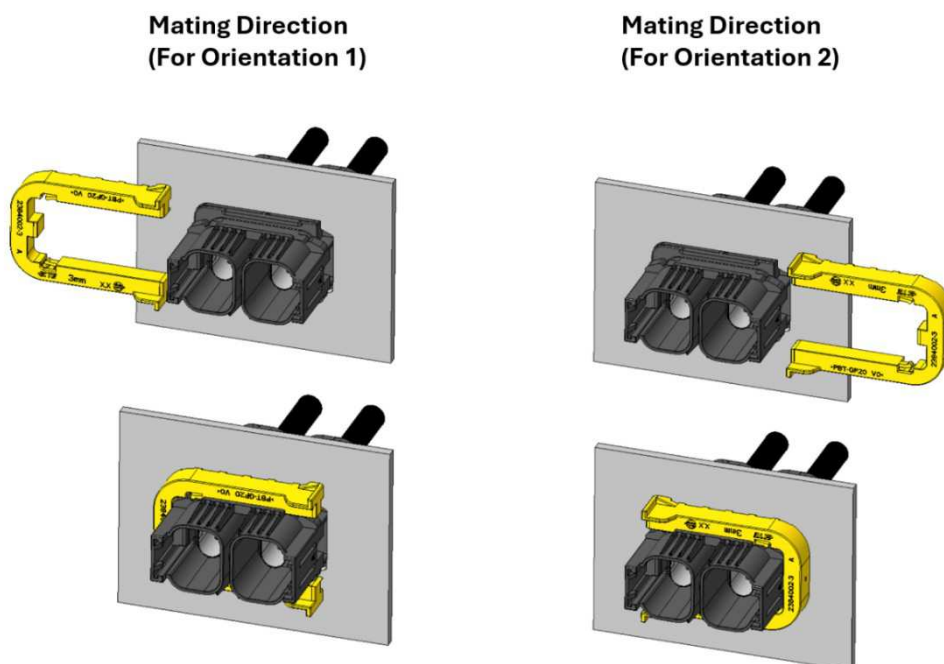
c.: Assembly of DT Highspeed 2 port Bulkhead Pin Assembly to Panel
